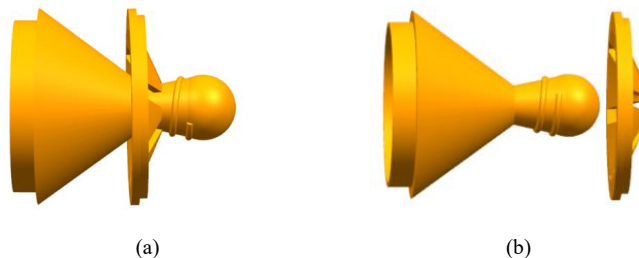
Two statuses of the assembly mechanism. (a) Docking. (b) Separation.
